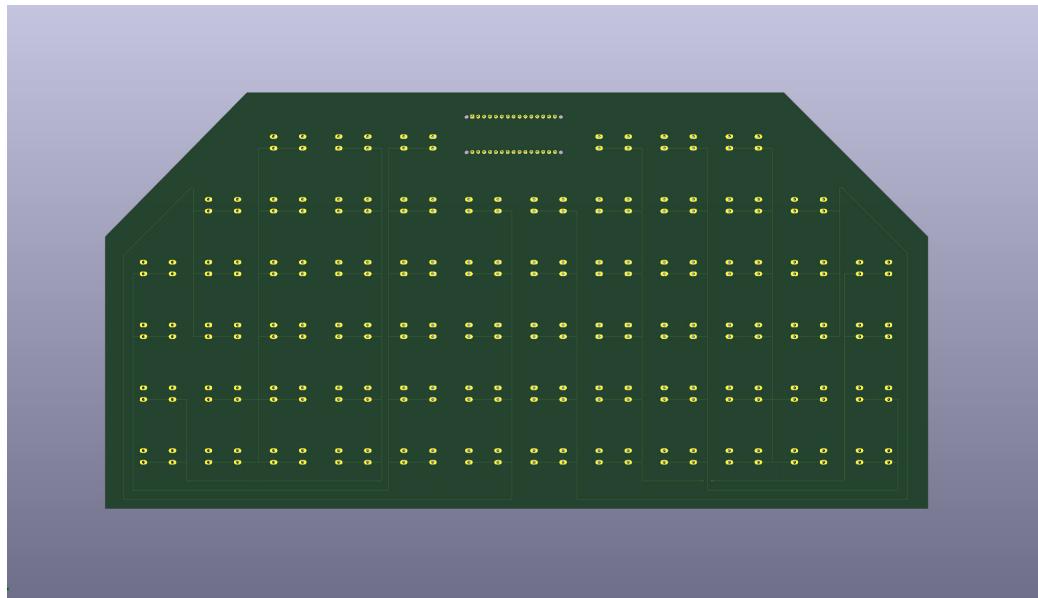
Final keyboard PCB design (rear view) showing the through-hole button switch pins and trace routing. This view reveals the manufacturing simplicity enabled by the button switch approach: all components mount from one side, simplifying factory assembly.
